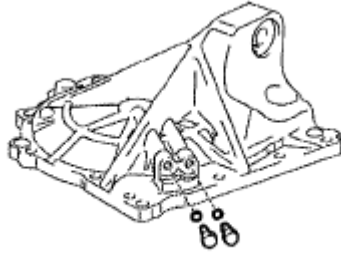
Installing O-Rings To Transaxle Case Plugs
